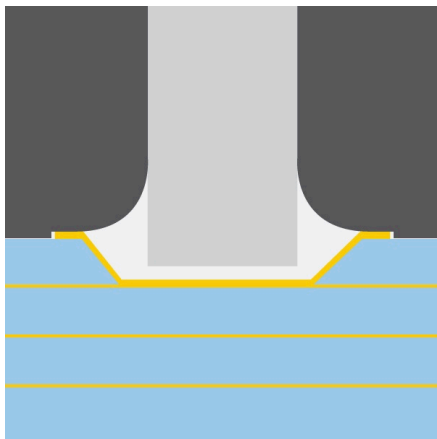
Cross section of green machined, open recess with seal frame soldered into recess. [7]
